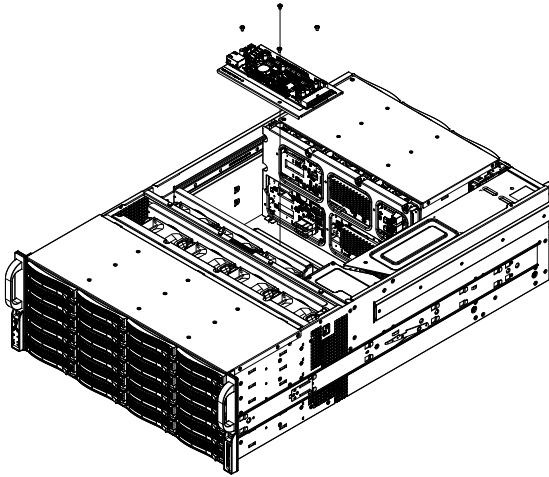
Installing the CSE-PTJBOD-CB3 Power Card into the Chassis
